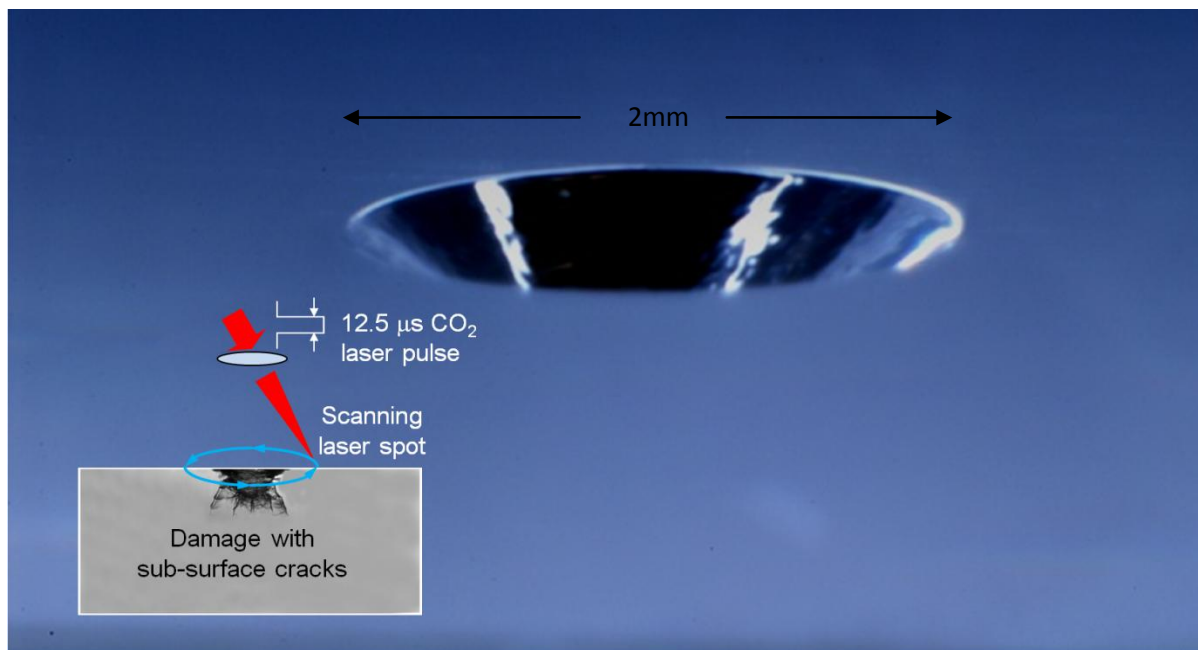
Fused silica laser damage material is removed by CO₂ laser micro-machining leaving a smooth laser resistant pit and laser hardened optical surface.
